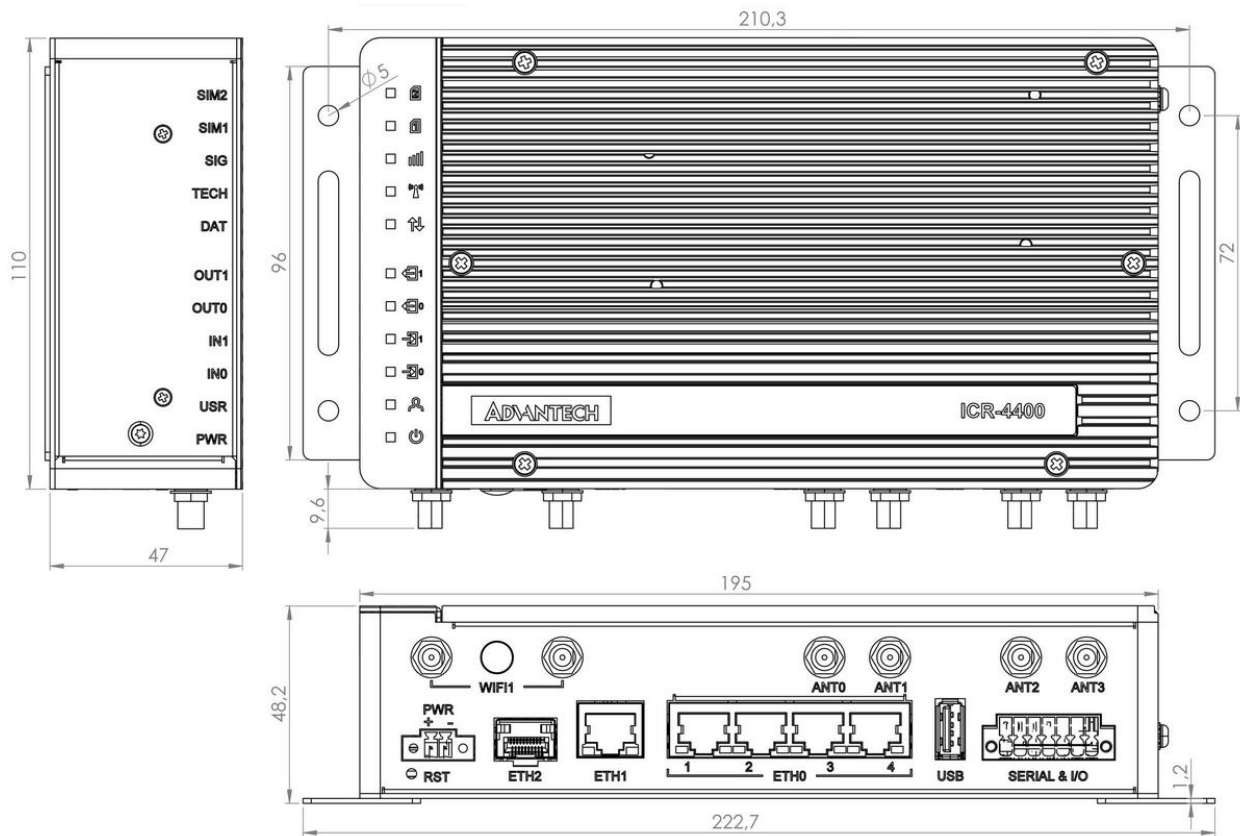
Router dimensions – front, top and right view with wall-mounting holder
